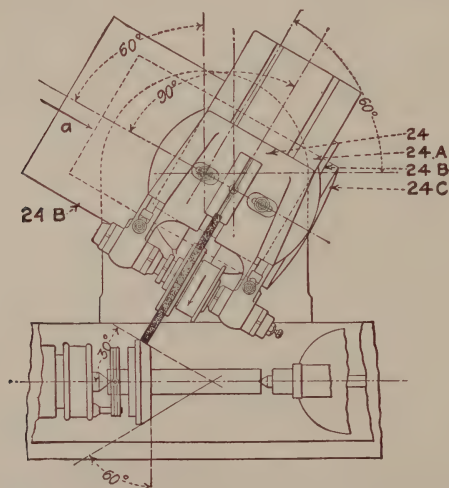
Grinding-machine wheel head set for grinding tapered work. Part numbers are same as shown in Fig. 279.
